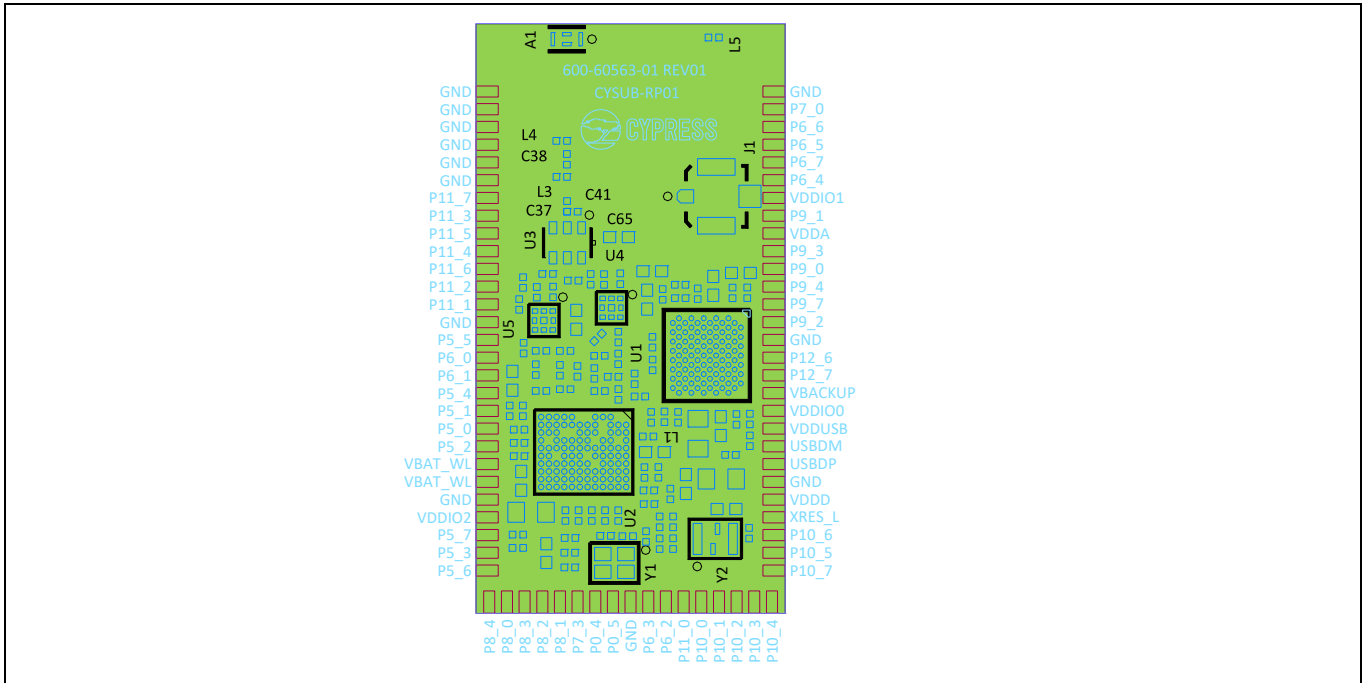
Board land pattern on host PCB (Top view seen on host PCB)
